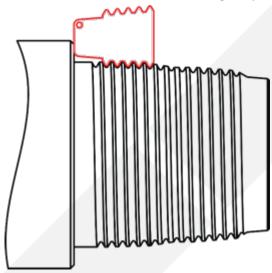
0.75 TPF THREAD PROFILE PIN
